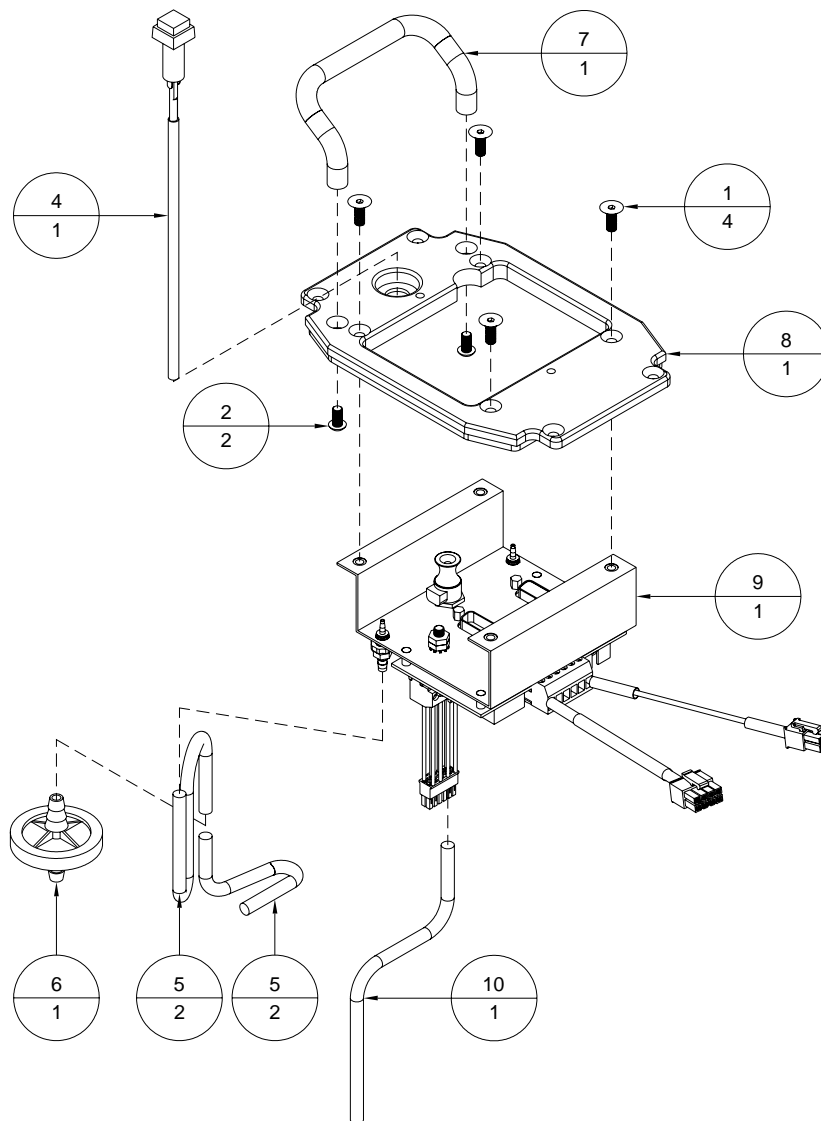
Top Plate Assembly, Singlehead (9102106A)
